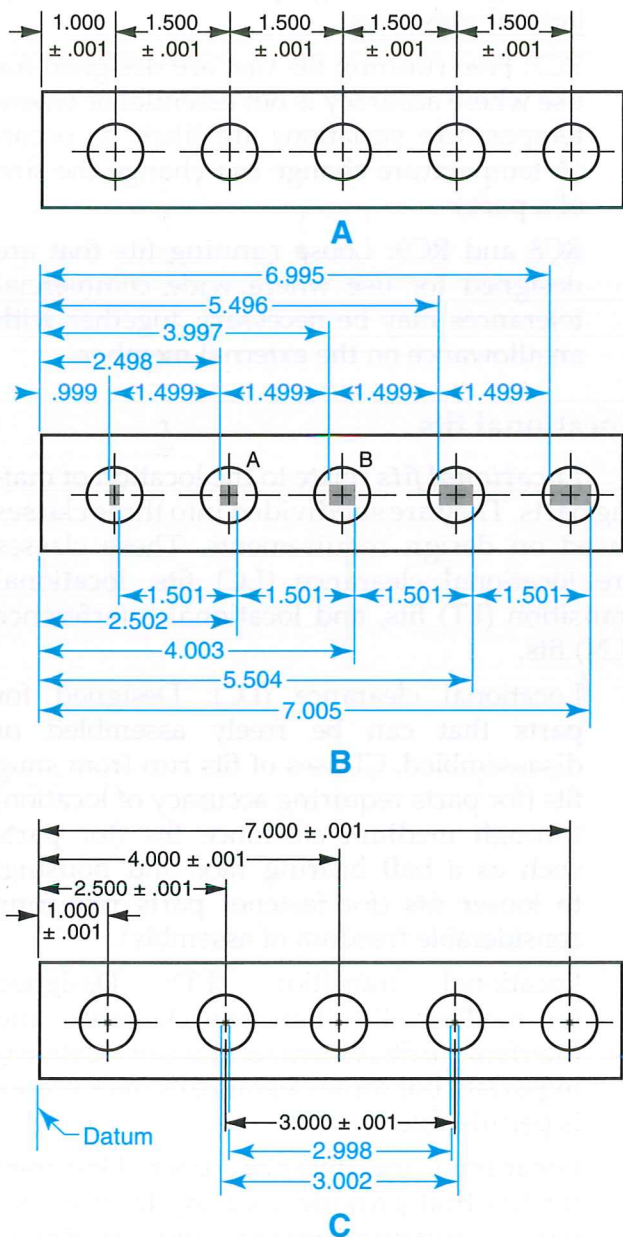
Tolerance accumulation in chain dimensioning and datum dimensioning. A—A part dimensioned with chain dimensions. B—In chain dimensioning, error can accumulate even though each dimension stays within tolerance. C—In datum dimensioning, the error is limited by dimensioning every feature of a part from a common point or plane.
